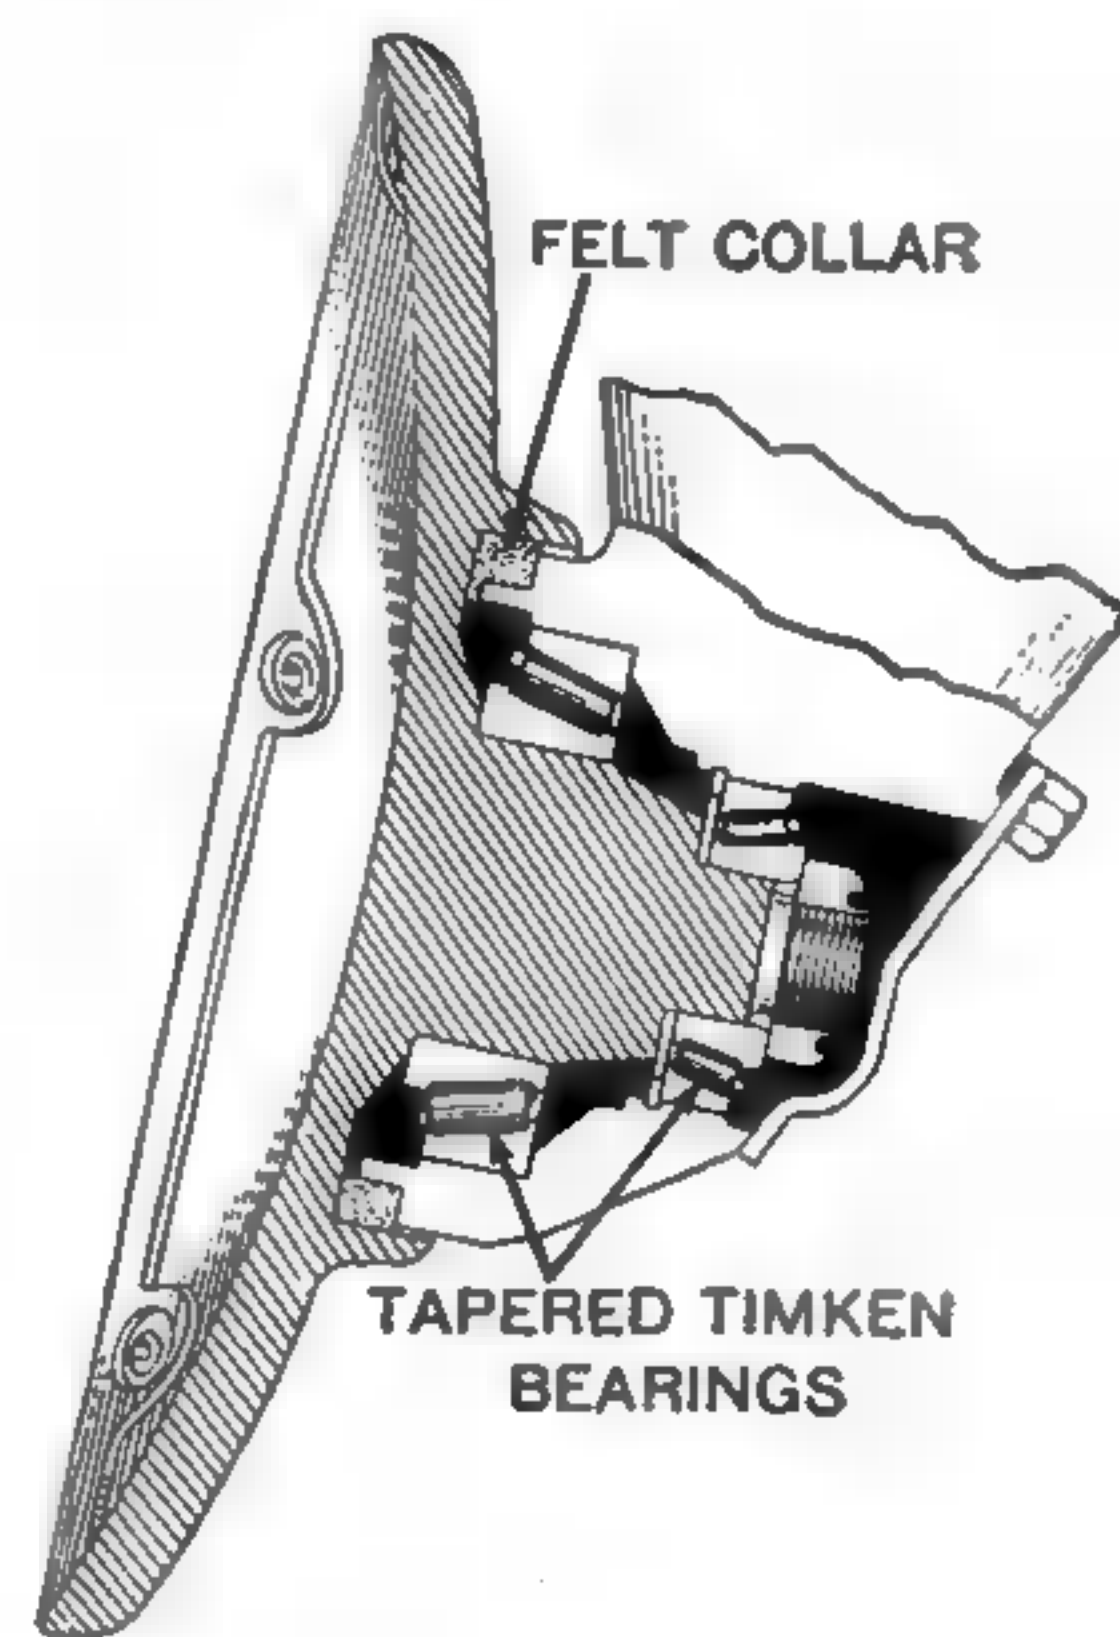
Showing cross-sectional view of roller bearing disk bearing with disk removed. Tapered roller bearings installed at spindle and shoulder carry the pressure of plowing with a minimum of draft. Expanding felt collar and overlapping flange on the disk spindle make this bearing dirtproof.
